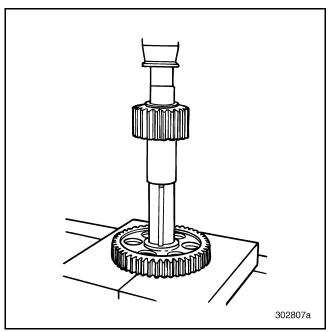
Pressing on Hi-Range/Hi-Split Gear
